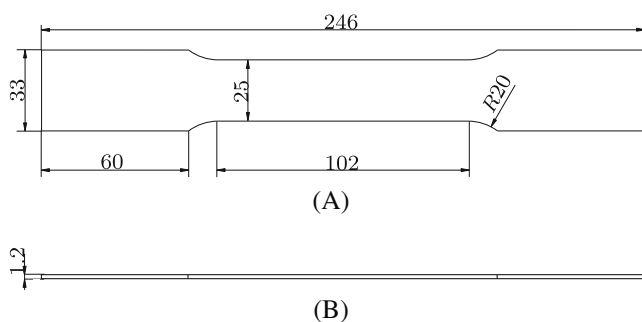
Dogbone specimen for tensile testing. (A) Technical drawing—top view and (B) technical drawing—front view. Reprinted from [14], with permission from Elsevier.
